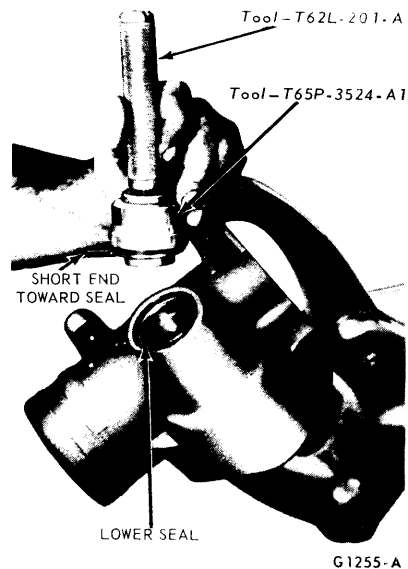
Installing Lower Bushing In Steering Gear Housing
